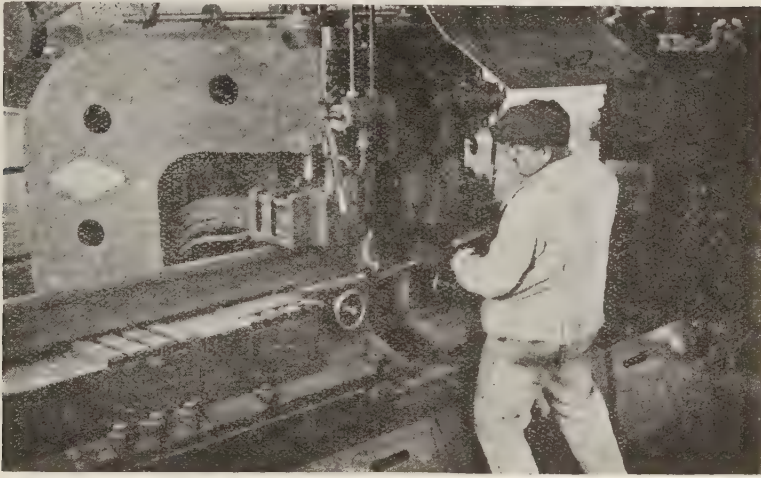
ter*. — Electric flash welding.
